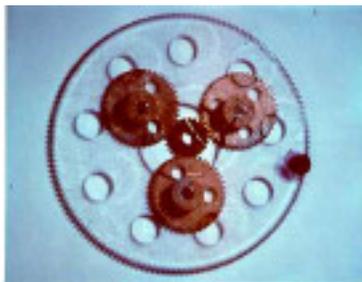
Top view of LIGA-fabricated planetary, sun, and output (PMMA) gears for an 8 mm rotary drive motor.
